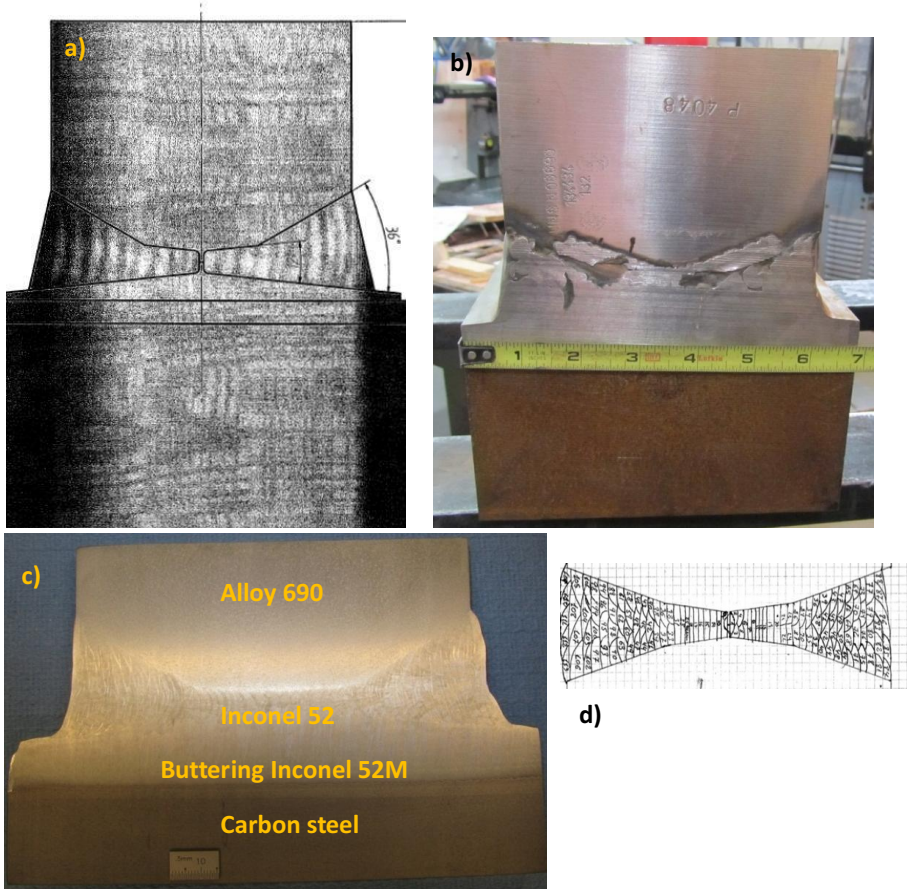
Views of the ENSA weld mock-up with a) schematic of the grooves and components, b) view of the broad sample, c) view of the weld polished and etched and d) schematic of the weld passes.
